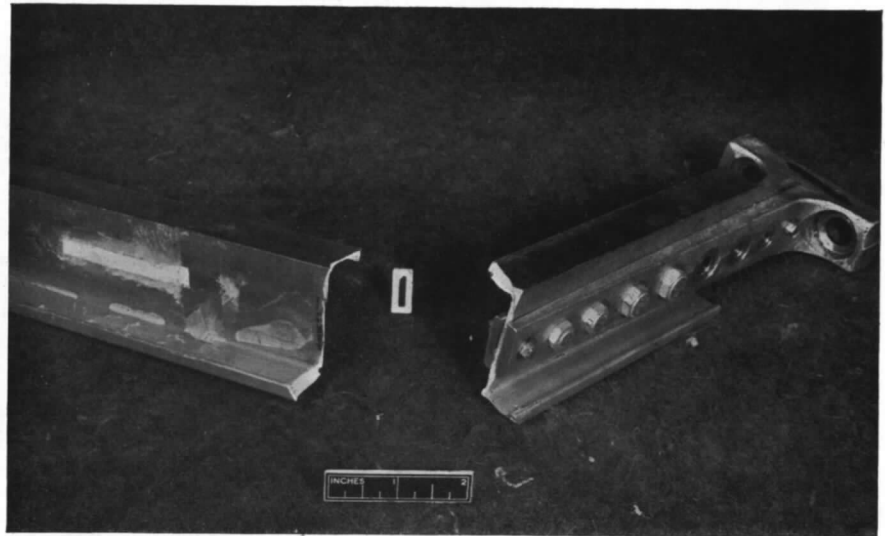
Nuts tight. Crack starts well clear of bolt hole.
